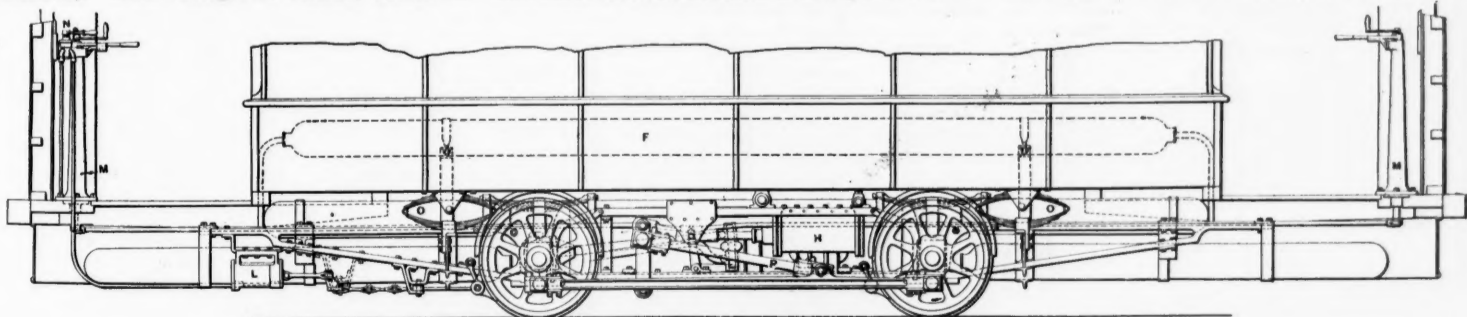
Elevation of Car, Showing Details of Equipment.
